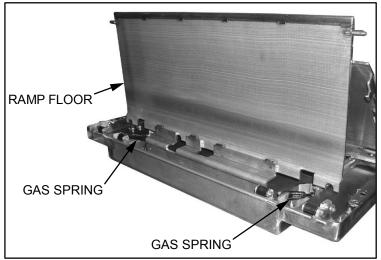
FRONT ENCLOSURE ACCESS
